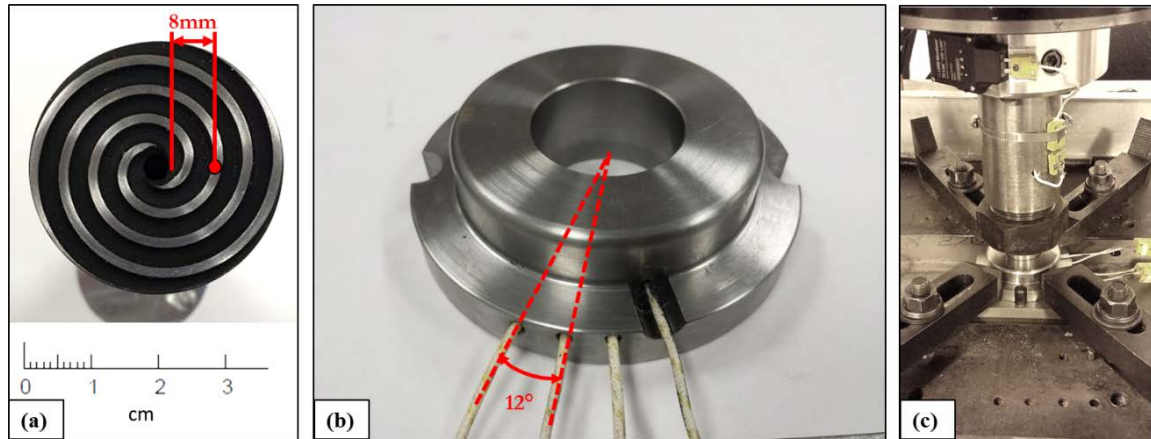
Experimental set-up #2 (a) Die scrolled shoulder, (b) Chamber and (c) assembly of the FSE setup.
